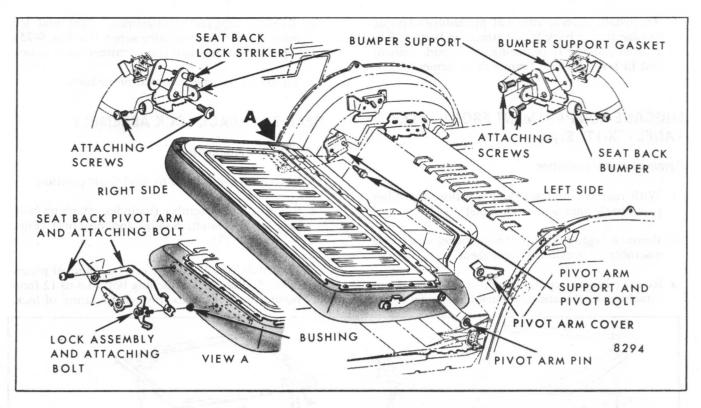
Folding Rear Seat Back Assembly - "H-07, 15 and 77" Styles
